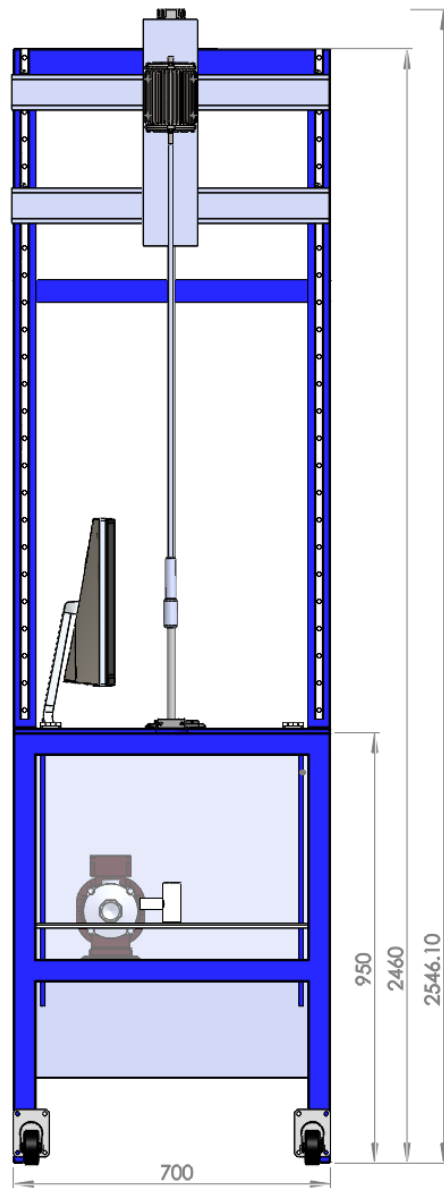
Front view of the rig in upright position (dimensions in mm)
